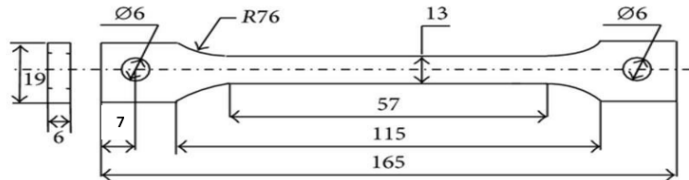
ASTM D-638 III, dumbbell mould with detailed dimensions (mm).
